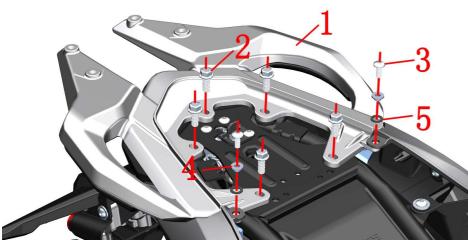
REAR COVER		Rear armrest assembly	CHK	0
